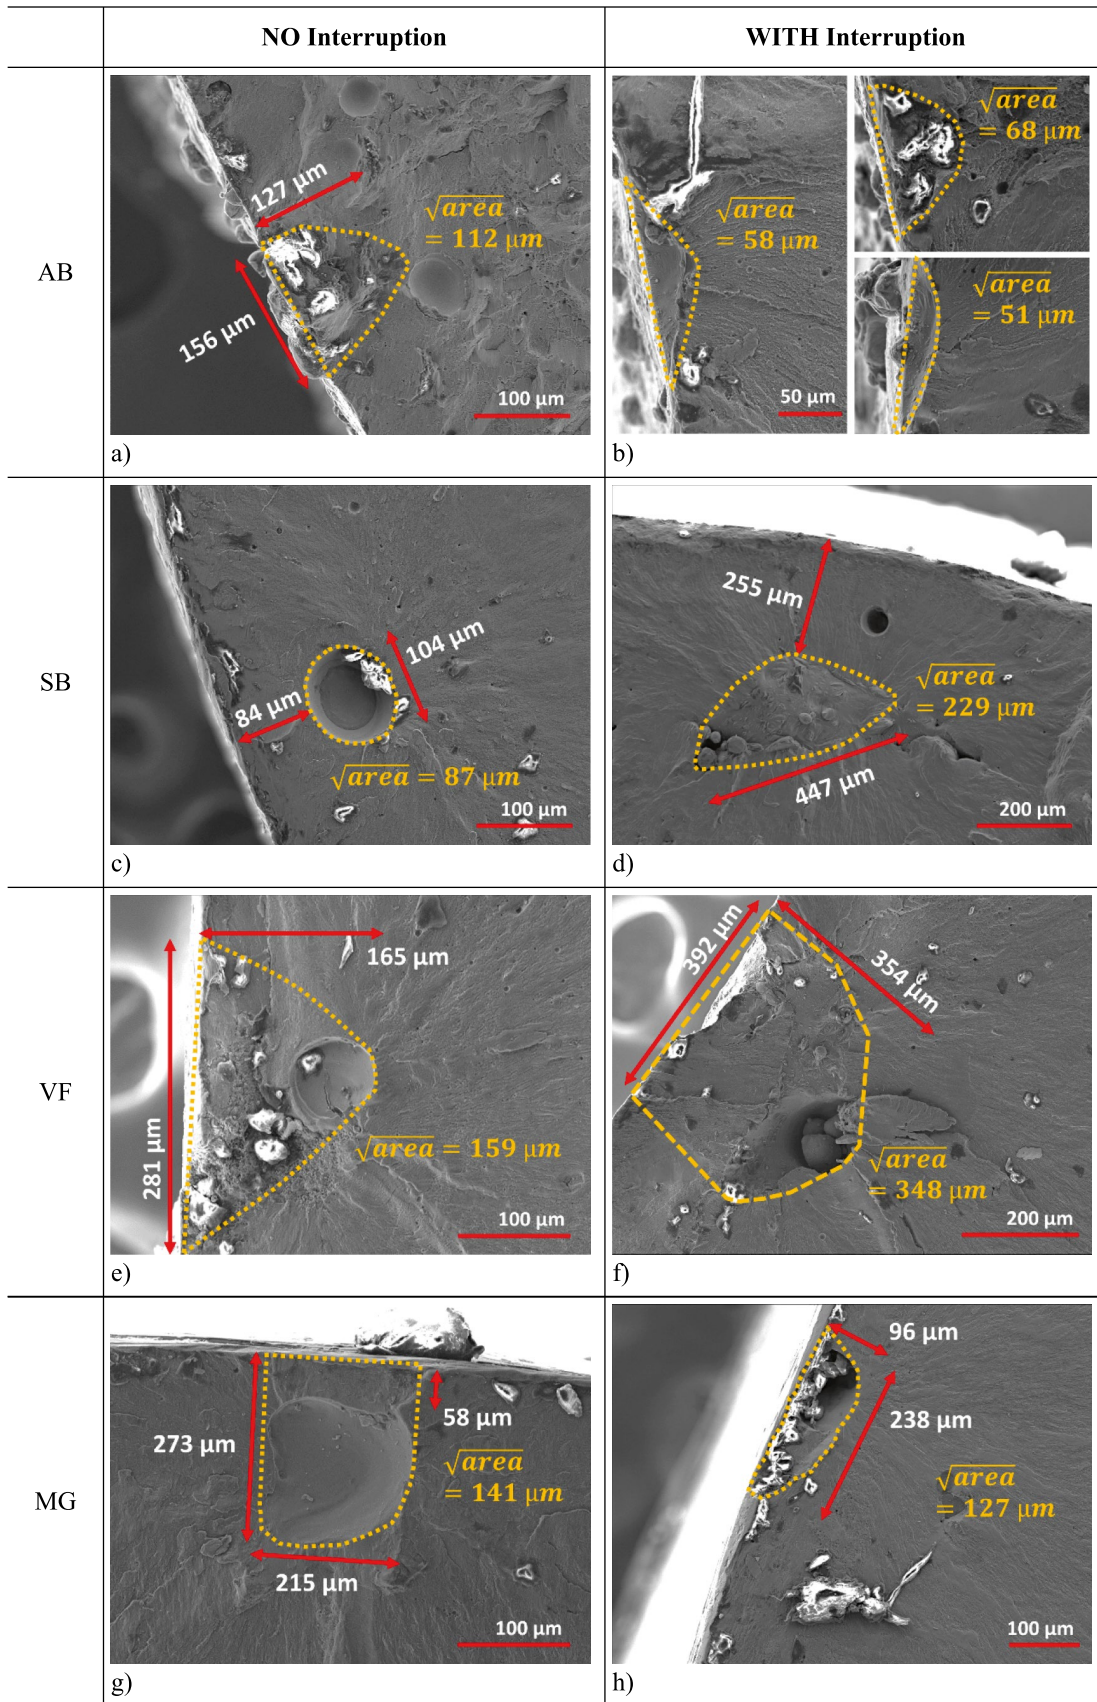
Exemplary locations, dimensions, and $\sqrt{\text{area}}$ according to Murakami [29] of fracture-causing defects
